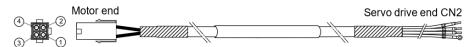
Servo motor power cable (HVPS06AB \_\_\_ MB, with brake cable)
